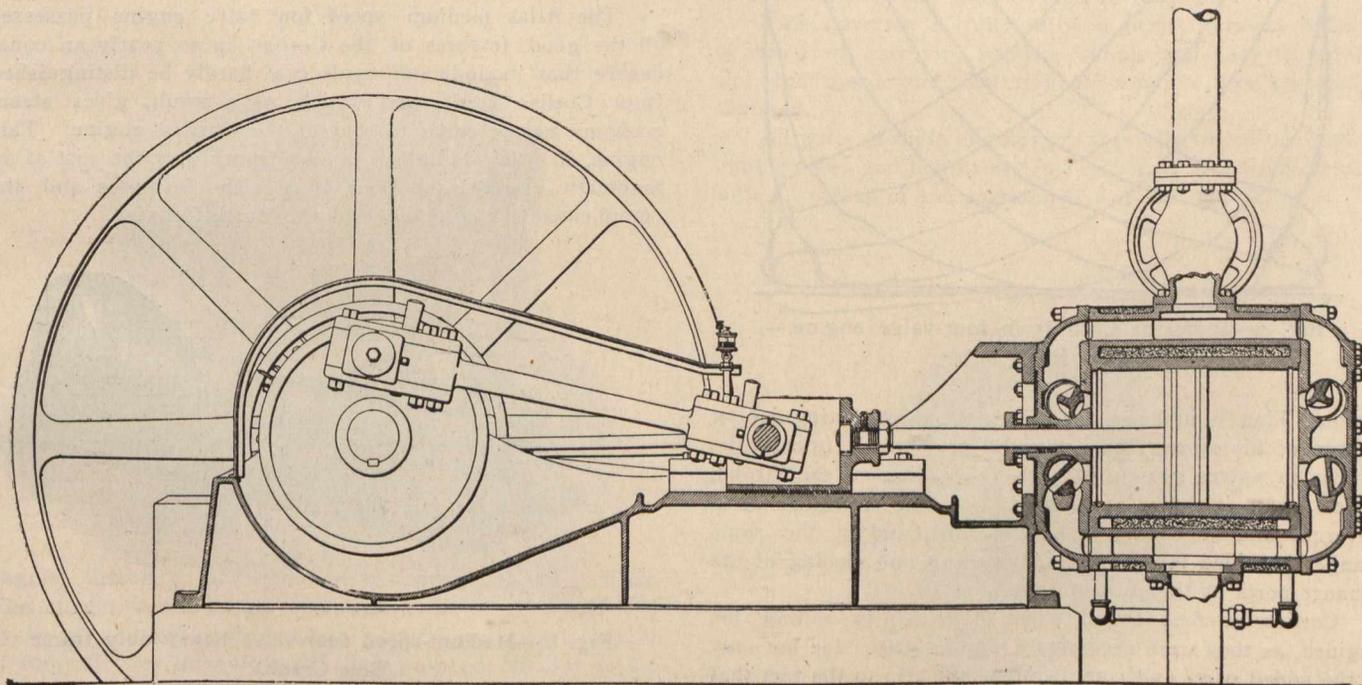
Automatic Four-Valve Engine.—Longitudinal Section.
